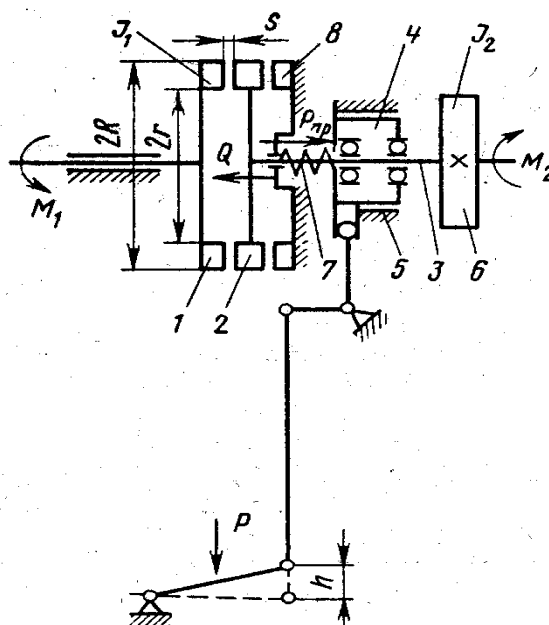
Kinematic diagram of the friction clutch of the sewing machine drive
